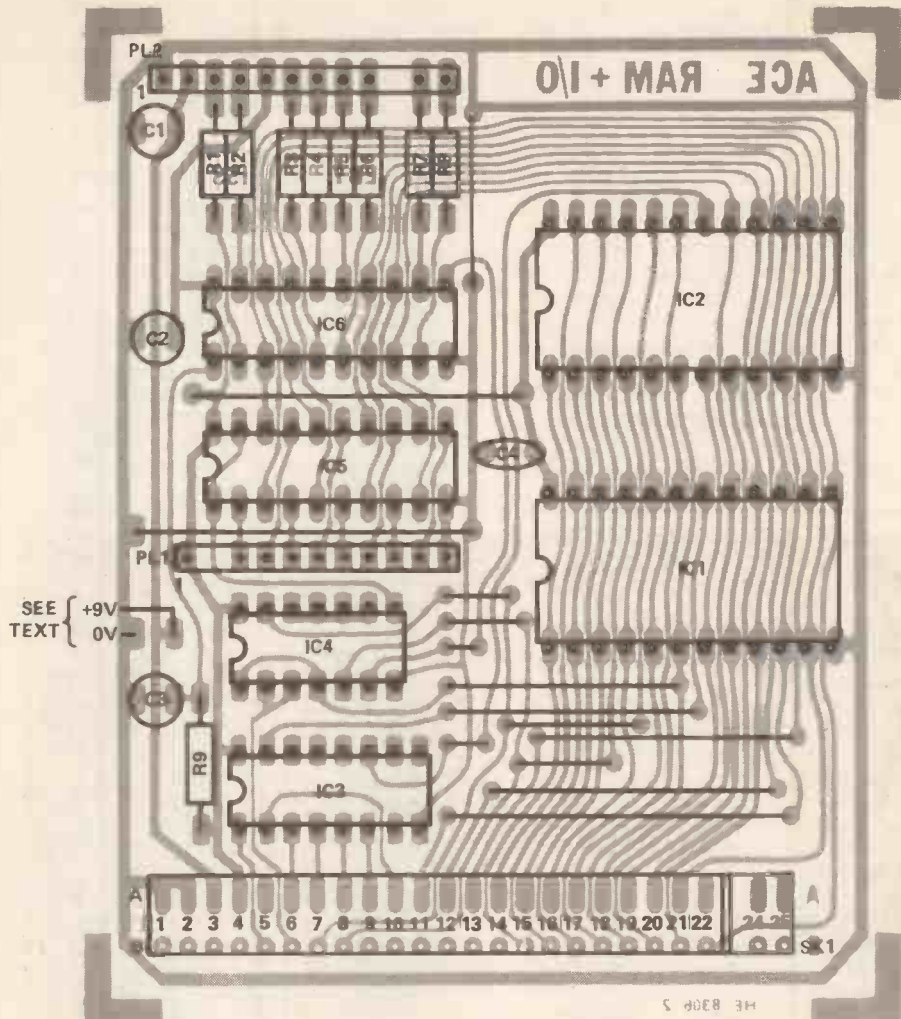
The PCB and components. Wire links are used to keep the board one-sided.
